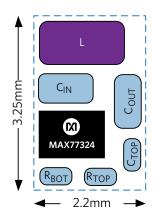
Single Buck Converter PCB (6.89mm<sup>2</sup>)
